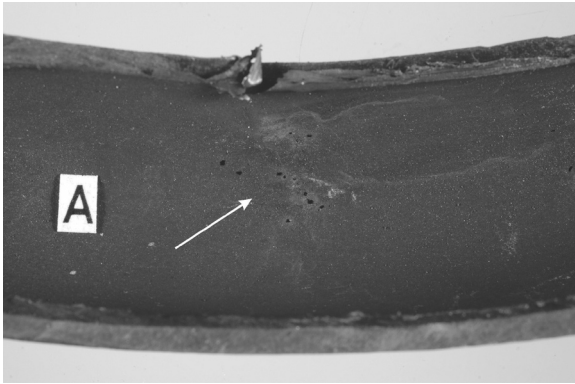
Pitting corrosion on the inner surface of the tube
